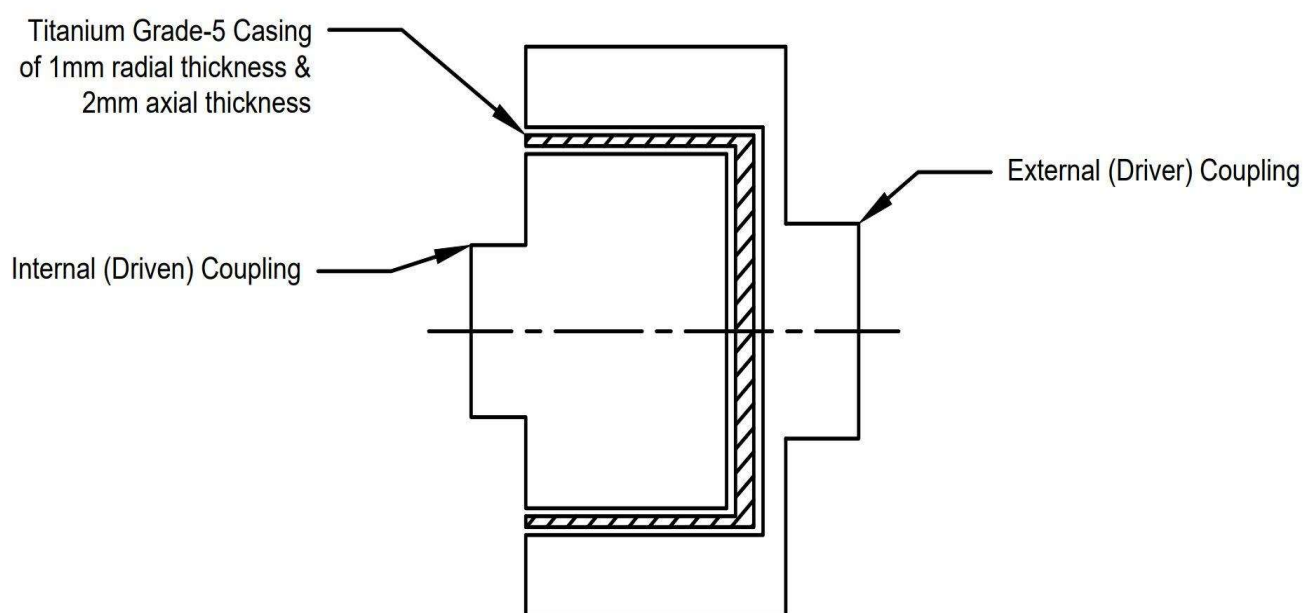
General arrangement of Magnetic Coupling with Pump Casing
